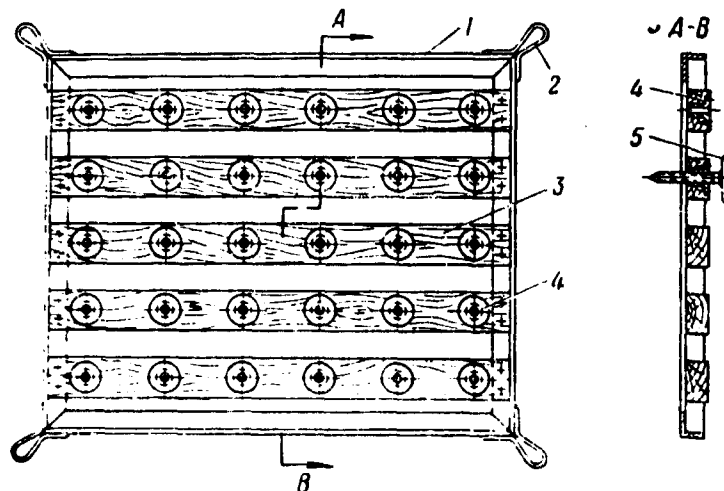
"Harrow" Device for Copying the Camber of Ship Hull's Outline: 1- frame; 2- eyebolt; 3- beam; 4- bushings; 5- measuring bolt.
